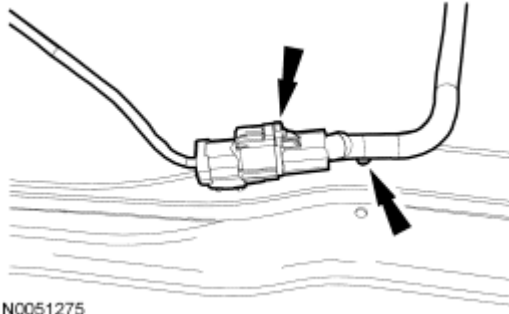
Locating Electrical Connector & Transmission Crossmember
